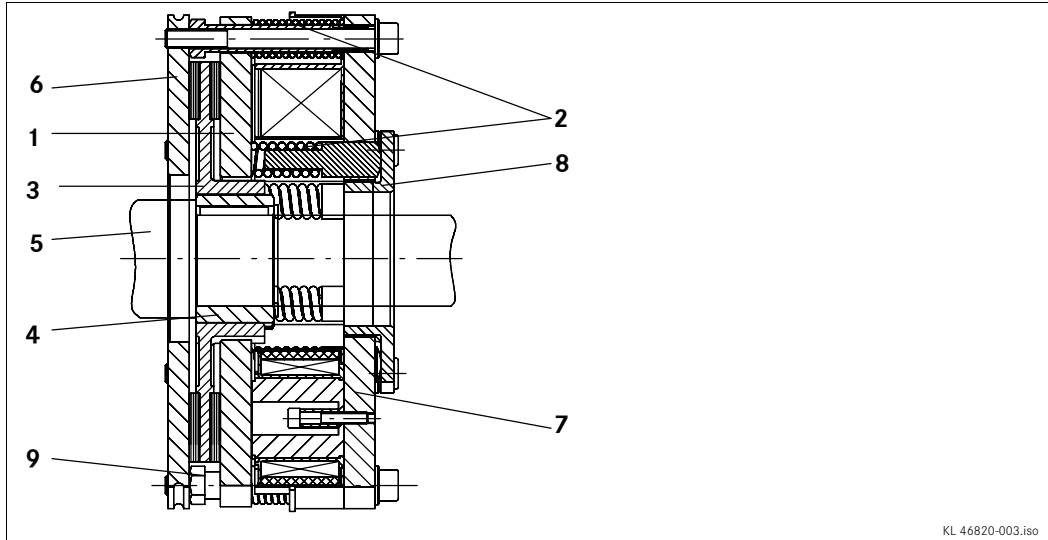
Design of the spring-applied brake INTORQ BFK468: basic module E (complete stator) + rotor + hub + flange
